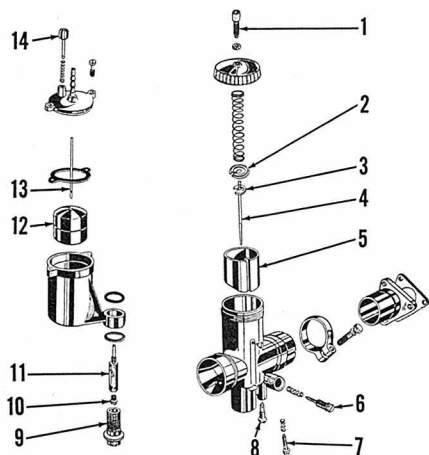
Exploded view of Puch carburetor used on 250cc models.
